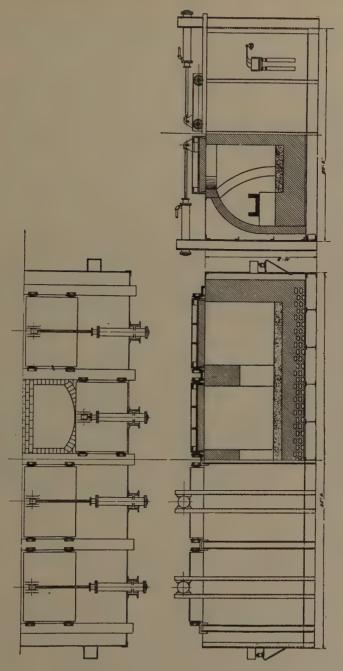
Pit Type Furnace for Soaking Ingots for Heavy Gun Forgings and Ship Shafts.
